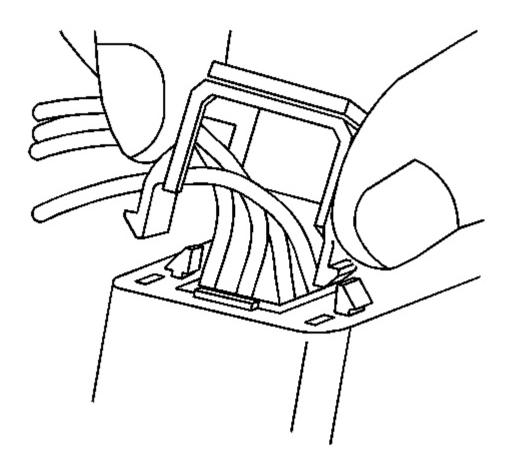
Removing Wire Dress Cover Courtesy of GENERAL MOTORS CORP.
